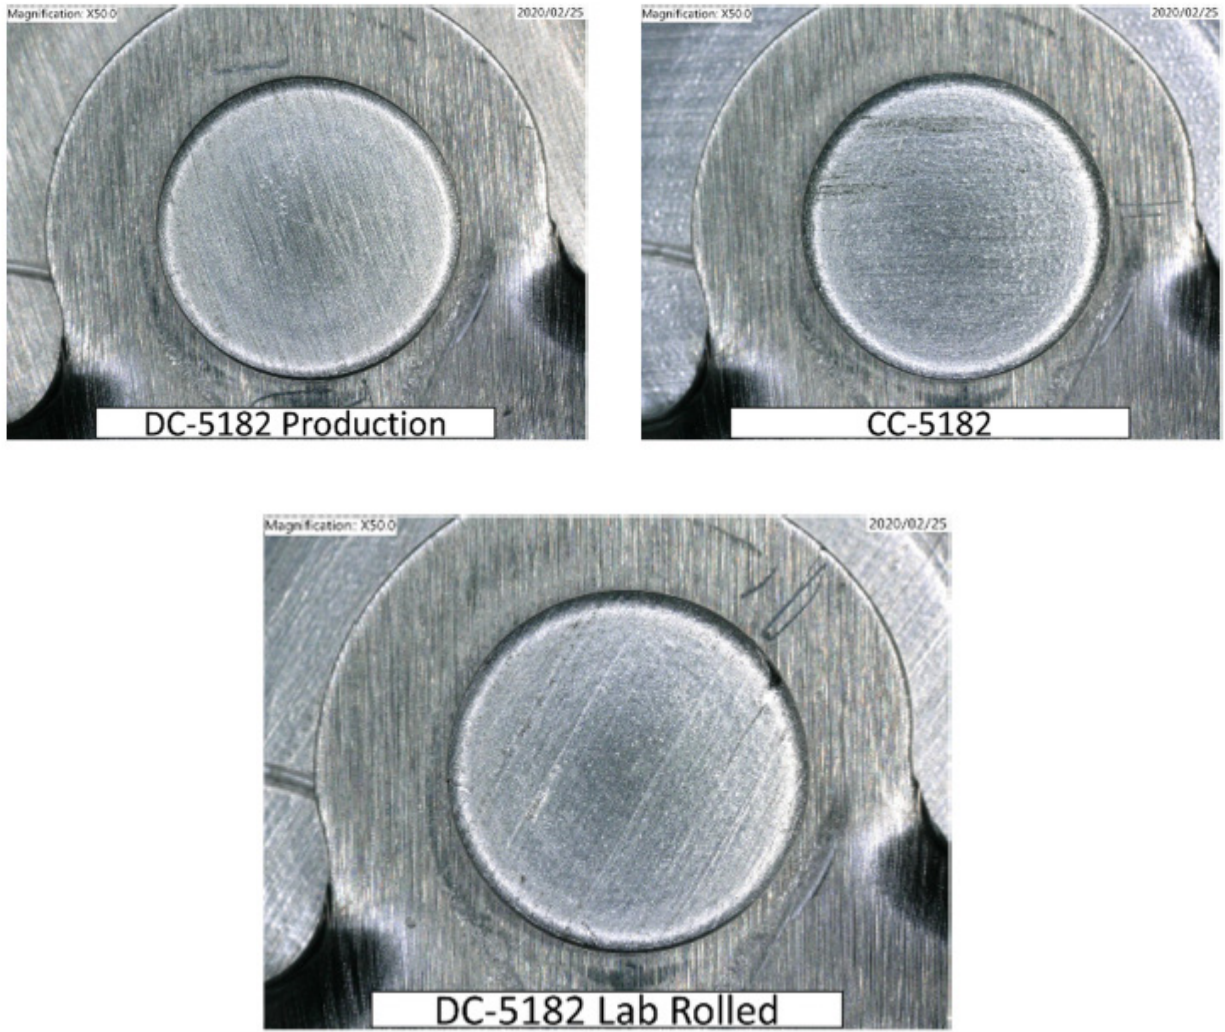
Rivet inspection of CC-5182 and DC-5182
